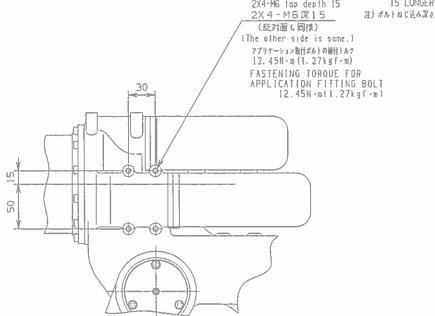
Detail of forearm peripheral equipment mounting risers
